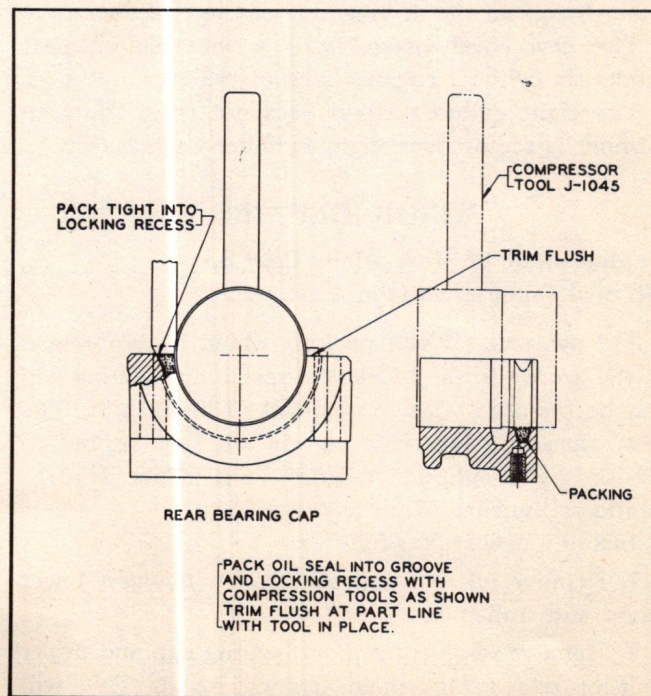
Trimming Second Seal to Correct for First Attempt Being Too Long
